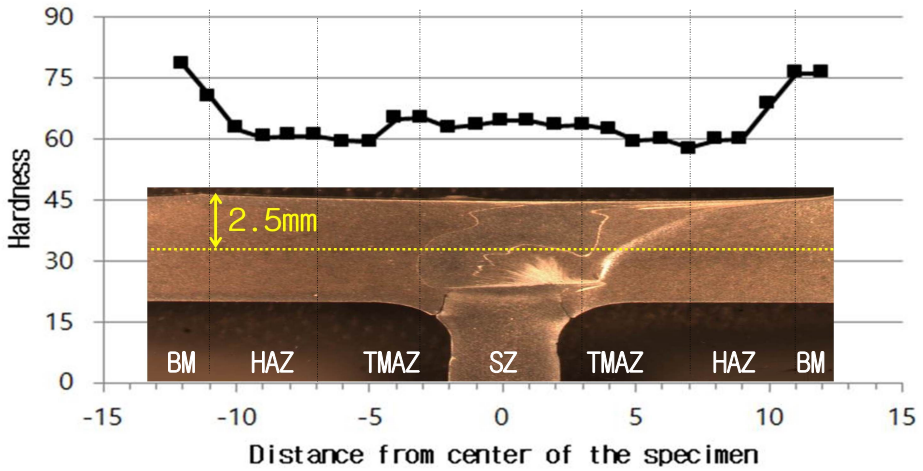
Hardness of T-joints fabricated in 500rpm with cylinder type
